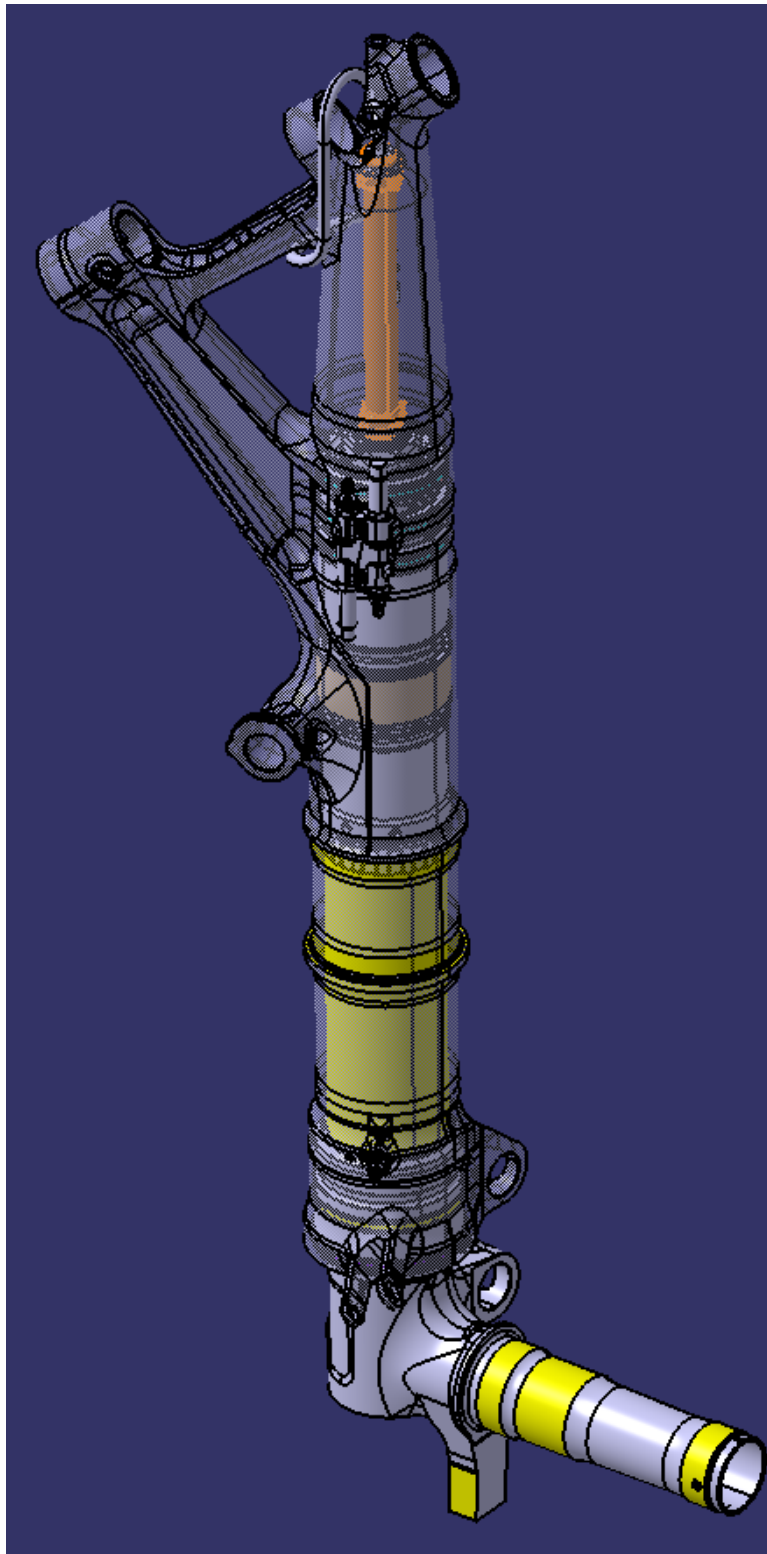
Current OST Plug and Fiber Optic Support Tube Assembled in Landing Gear
